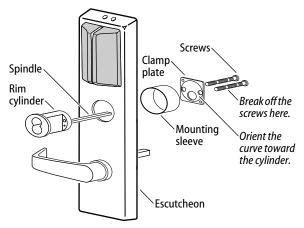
Installing the cylinder for Von Duprin rim and rod exit devices
